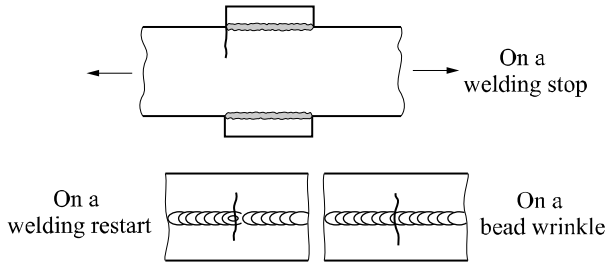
Fatigue cracking of a longitudinal butt weld
